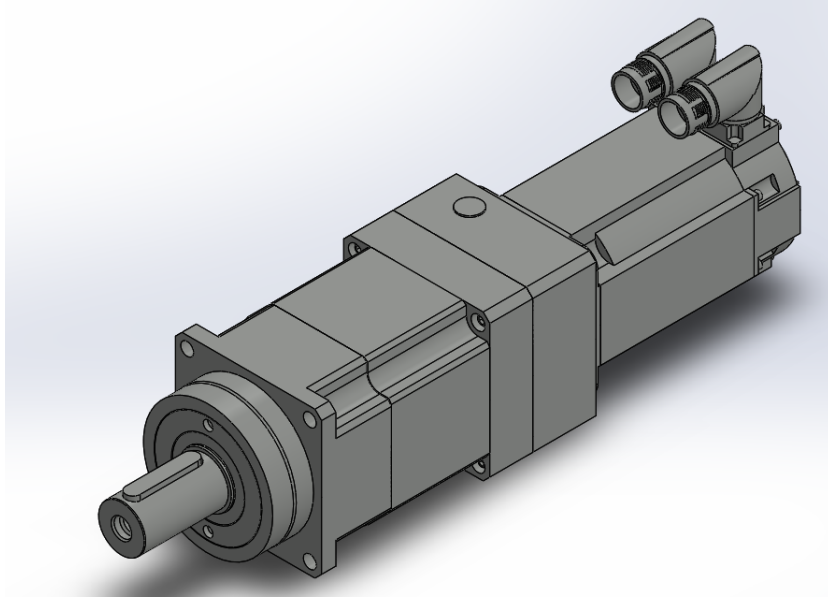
3D rendering of the gear motor assembly (motor : AKM2G-42NLANC22-10 [20] ; gearhead : VT010-025-0 RM100-40 [22])
